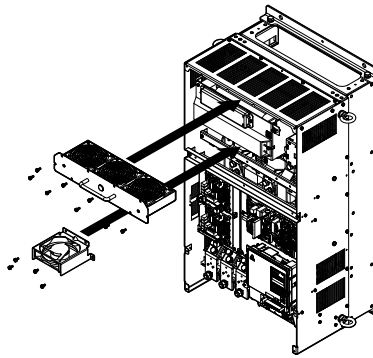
Install the Cooling Fan Unit: 4A0414
